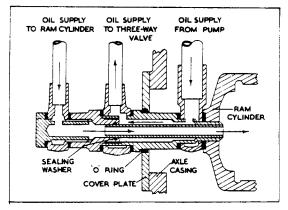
SECTION THROUGH RAM CYLINDER UNION
